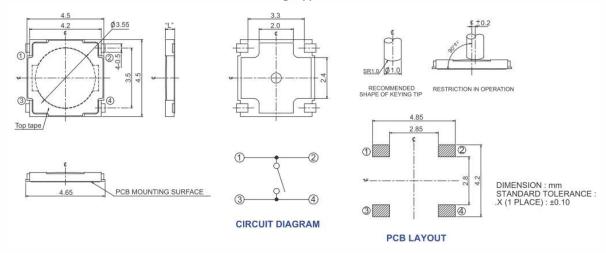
223BM2VA..., Surface Mount Gull Wing Type 2, Flat surface
